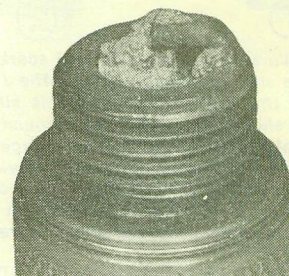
Gray, metallic aluminum deposits on plug. This condition is caused by internal engine damage. Engine should be overhauled and cause of damage corrected.
